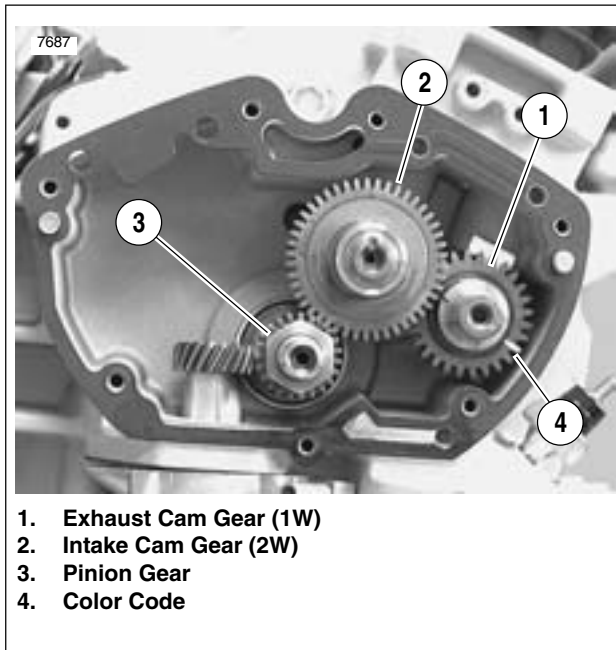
Cam and Pinion Gear Color Code Location and Timing Mark Indexing
